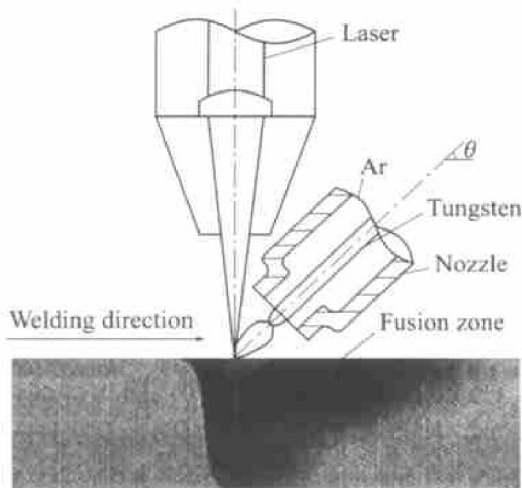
Principle of laser-TIG hybrid welding
